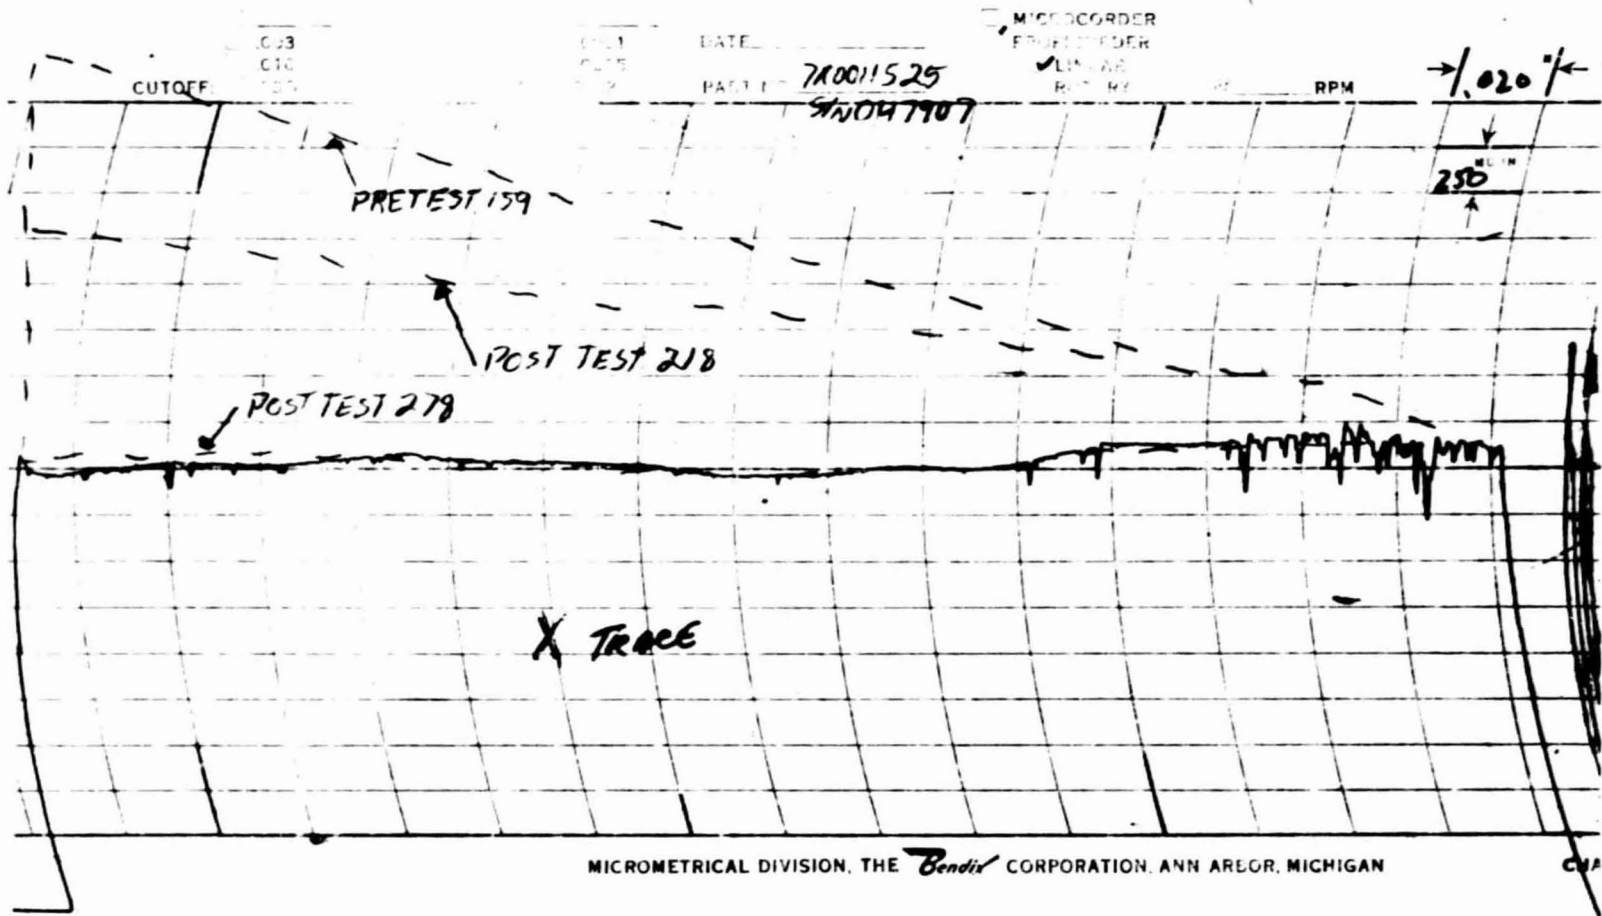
Surface Profile Trace Turbine End Primary Seal Ring, P/N 7R0011525, S/N 047907, Build 15, Posttest 297
